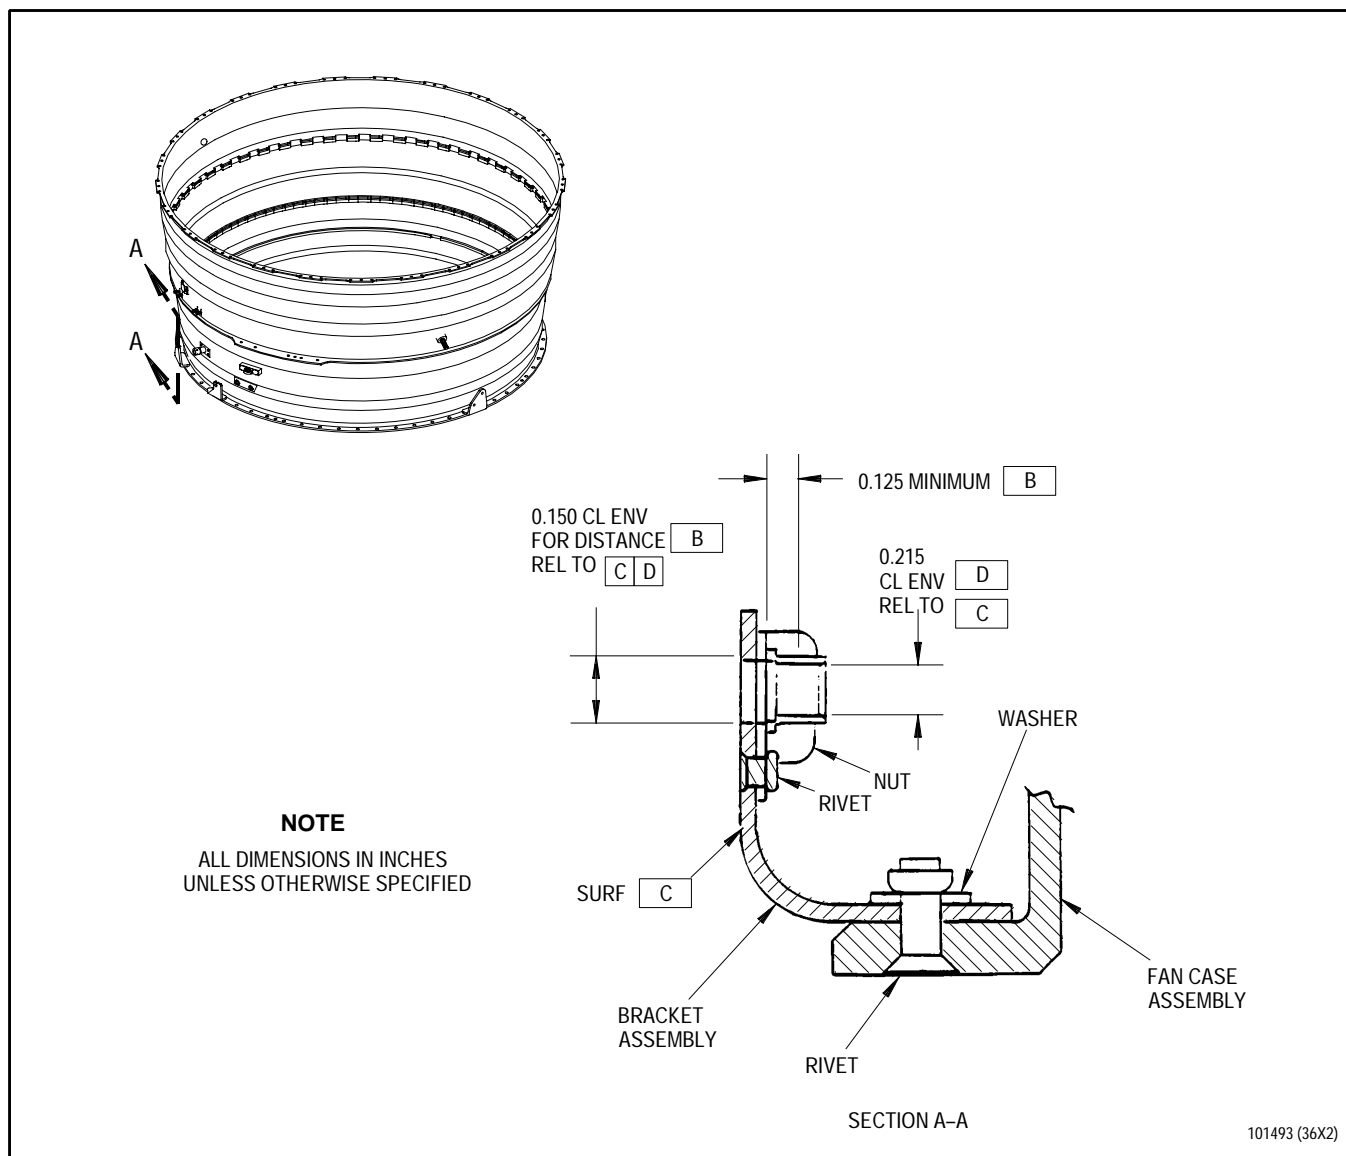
Fan Case Assembly - Bracket Assembly and/or Nut Replacement
